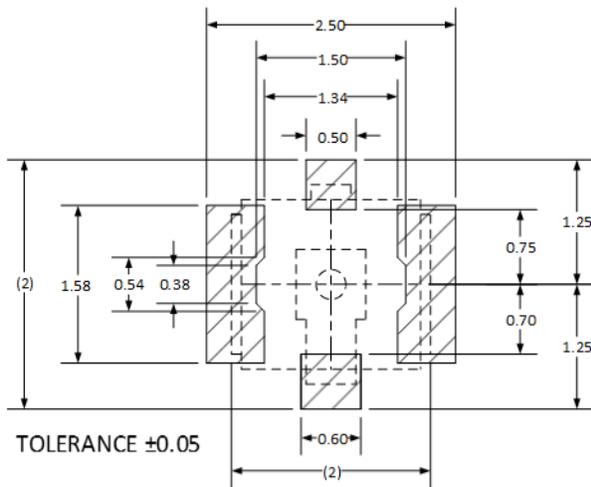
Antenna Connector PCB Recommended Land Pattern
